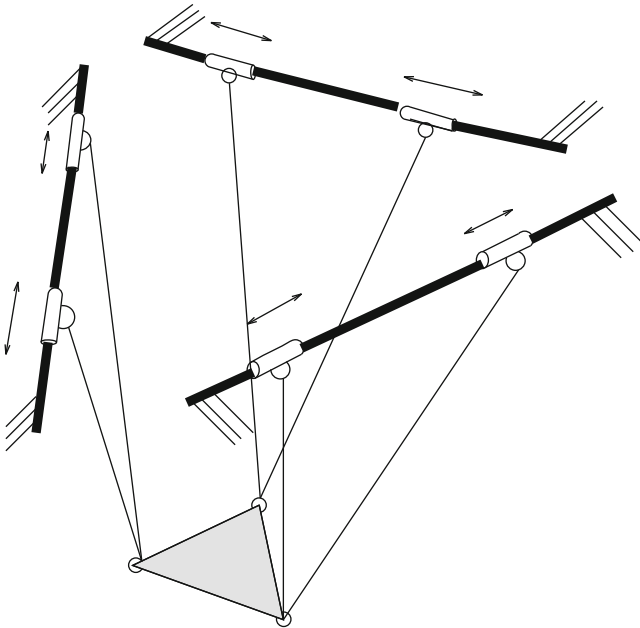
Kinematic structure of the 6-dof machine tools
